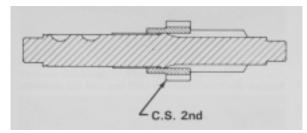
Press 2nd speed gear on countershaft with hub of gear as shown.
